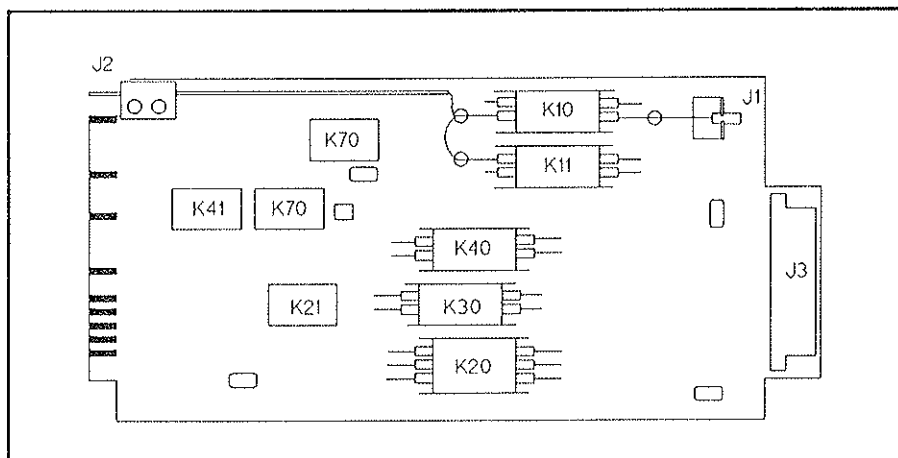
Part Locations of SMU Port Board—96-pin SWM
